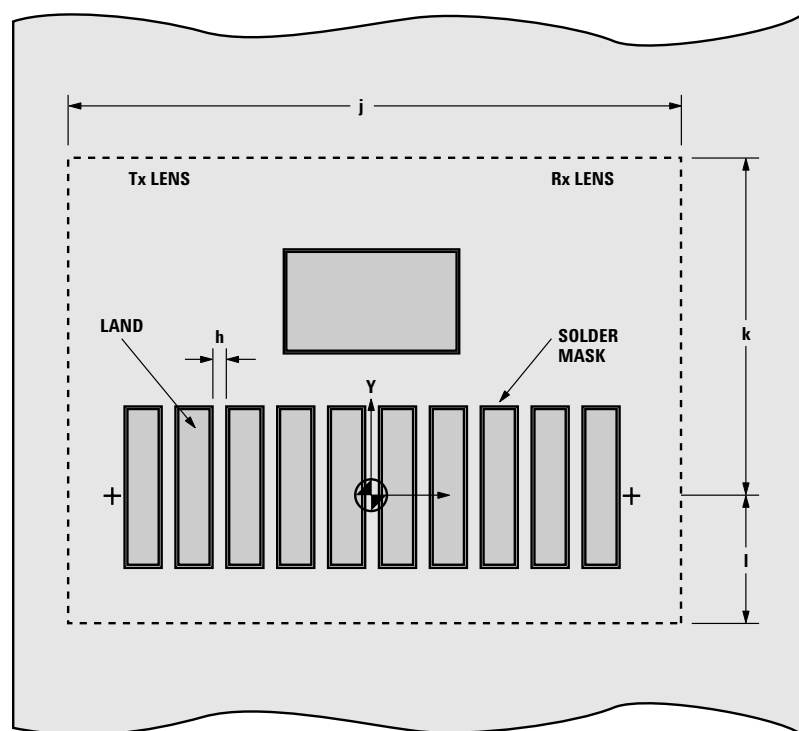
HSDL-3602-007/-037 PCBA-Adjacent land keep-out and solder mask.
